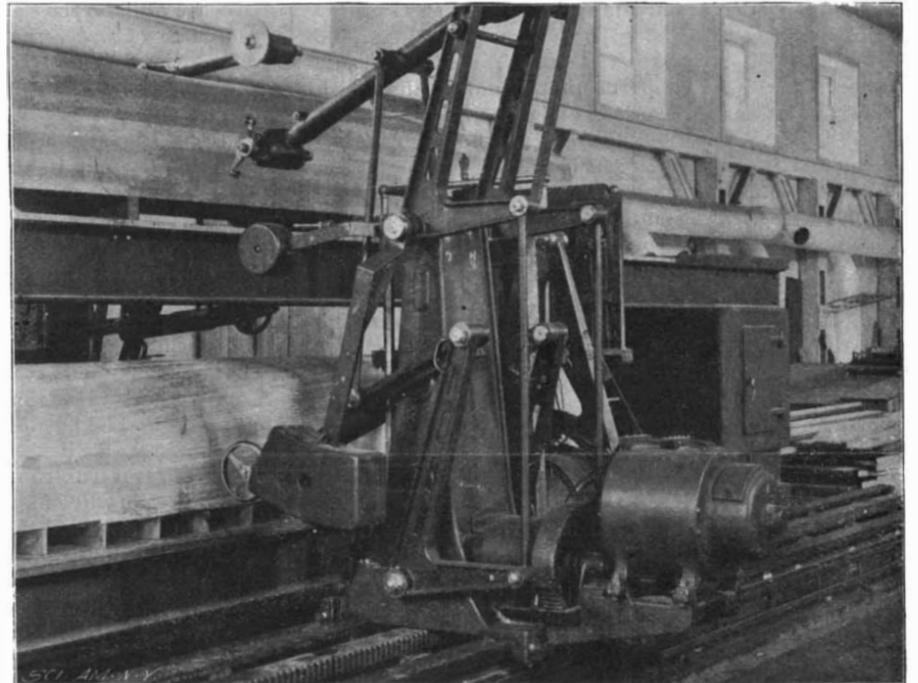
Model-Cutting Machine. ("Former" is Below, Model Above.)
